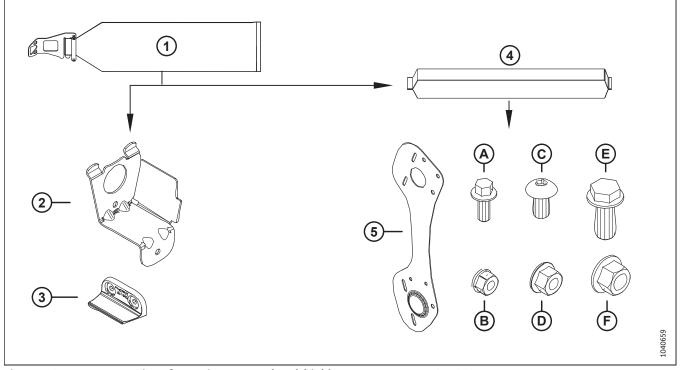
Parts to Retrieve from Nine-Bat Reel Endshields Parts Bag - MD #311363
